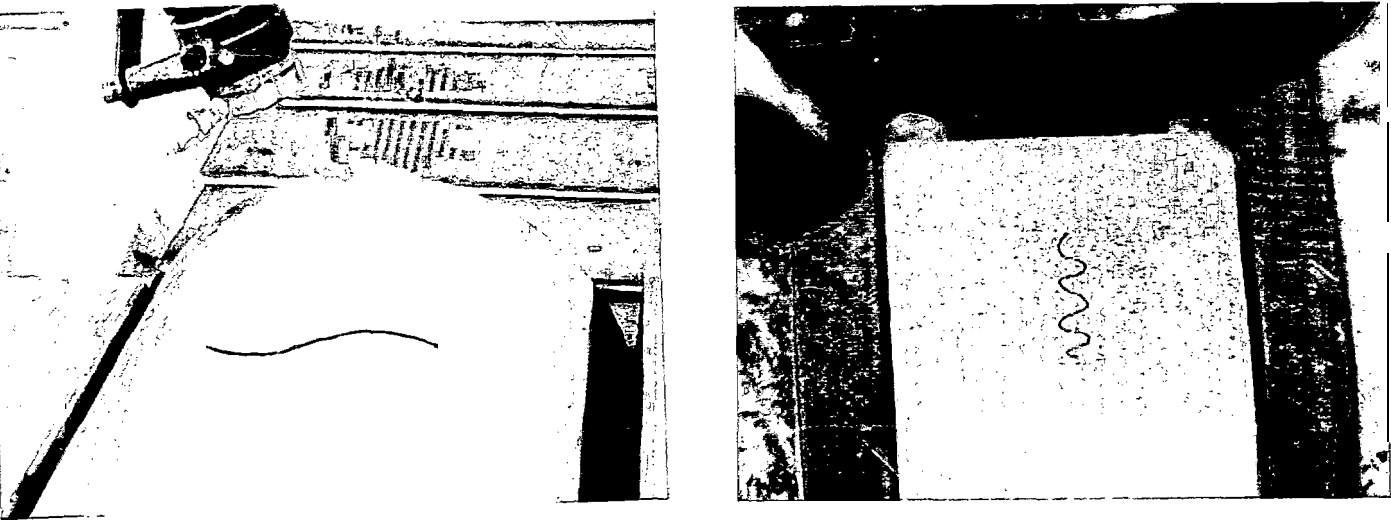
Example of the crack paths repaired by robolaser processing on a hemicylinder of Haynes 230.
